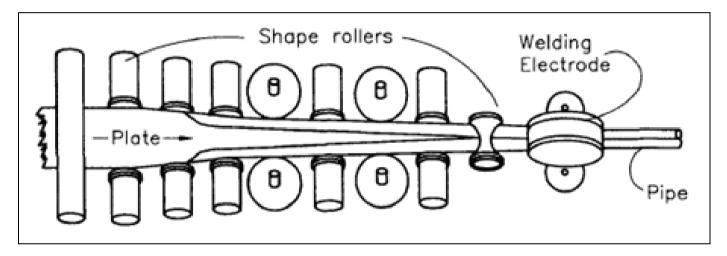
Schematic representation of the forming process on an ERW tubemill (from Pipe Drafting & Design, Parishan & Rhea)
